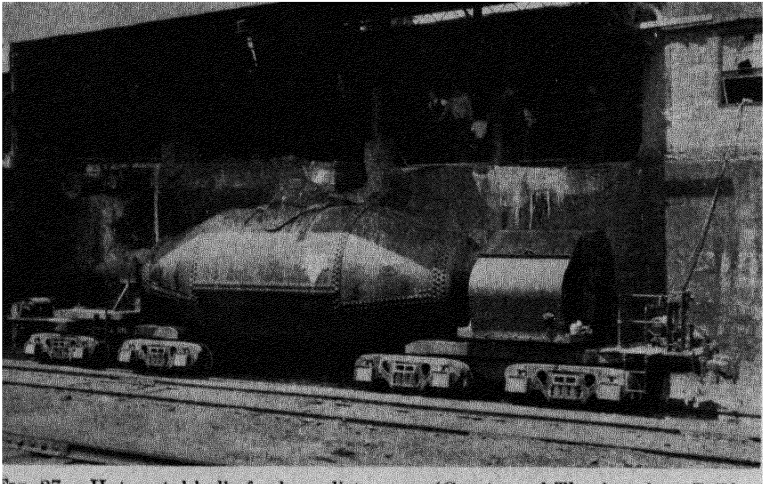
Hot-metal ladle for long distance. (Courtesy of The American Rolling Mill Co.)
